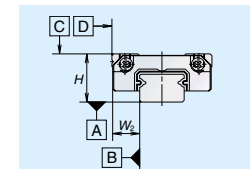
Drawing for accuracy standard (Mounting width  $W_2$ )
